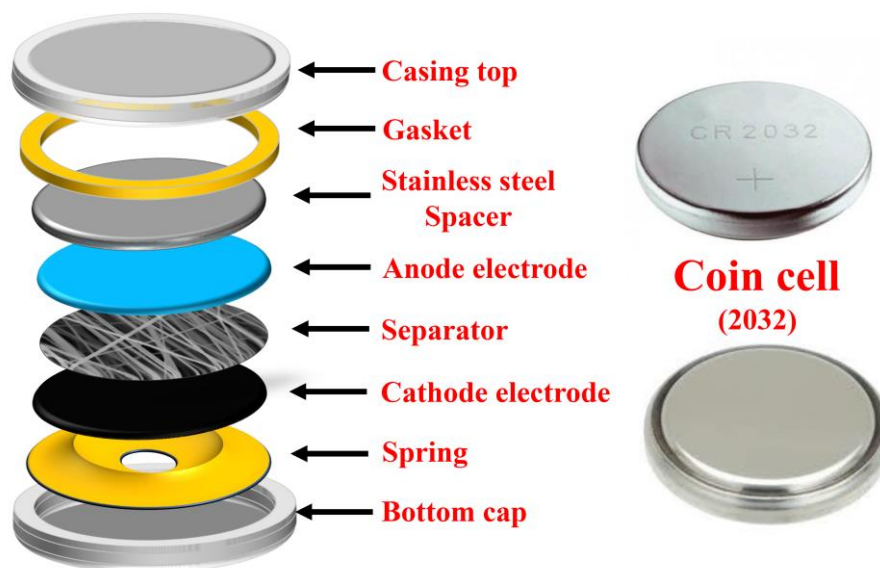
Schematic diagram of the package assembly of the Li/PHNF/LiCoO₂ in a coin cell.
